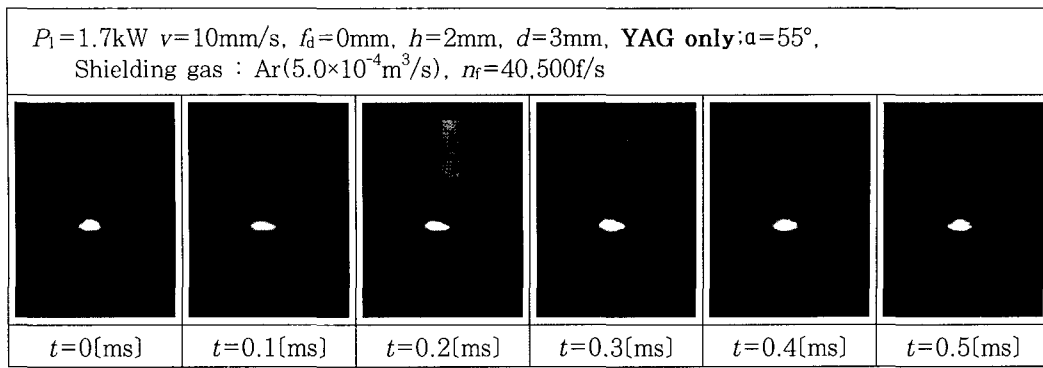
High speed photographs of laser induced plasma/plume of STS304 during YAG laser welding
